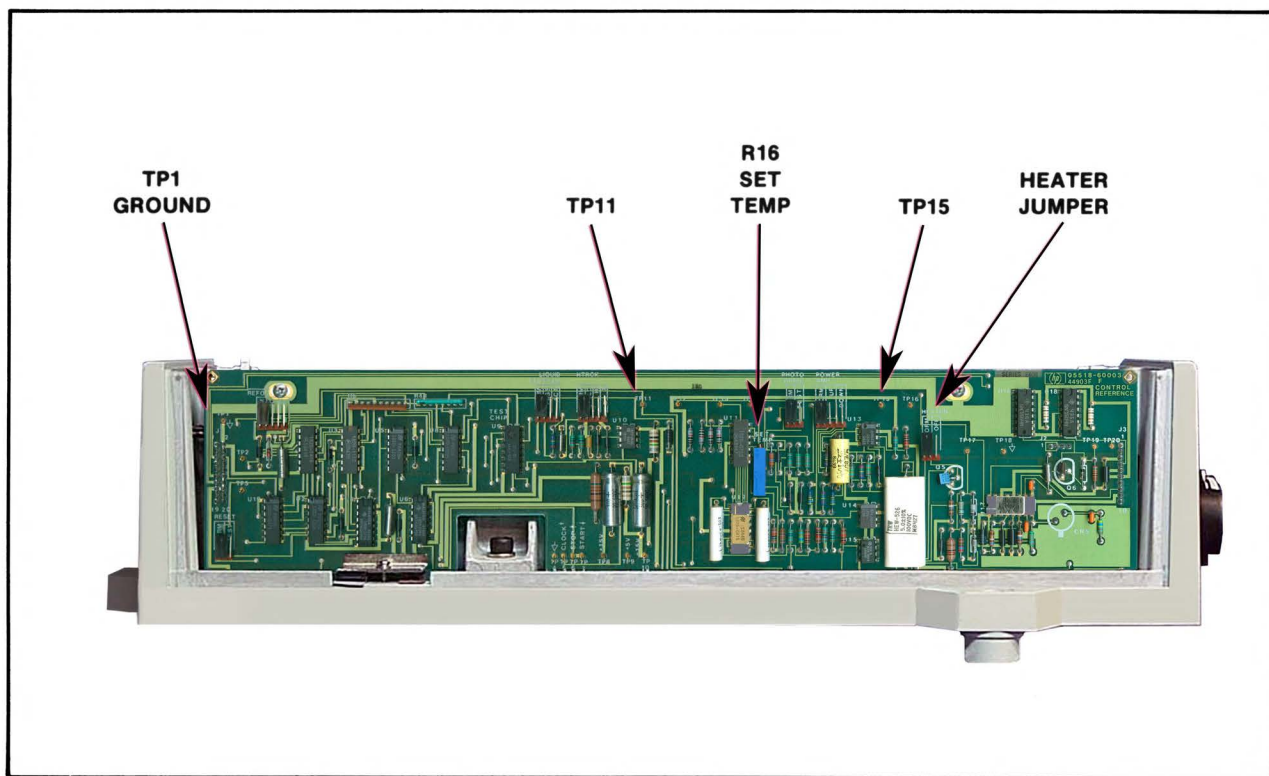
5517A A3 Controller/Ref Board, Jumpers, Test Points, and Adjustment Locations
